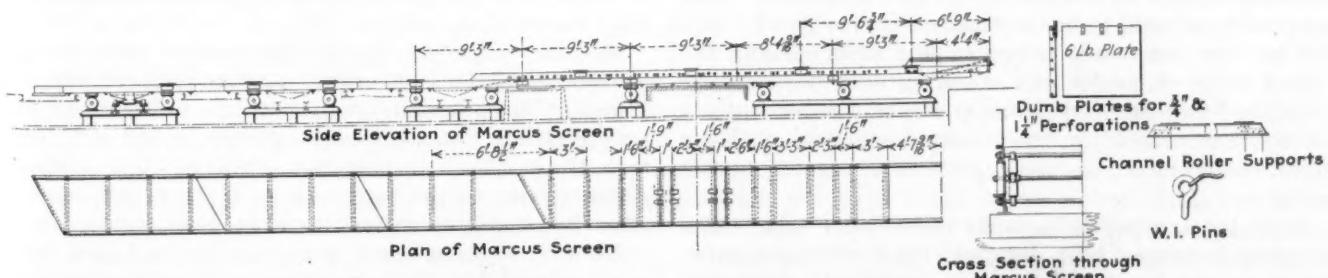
SIDE ELEVATION AND A PLAN OF SCREEN
